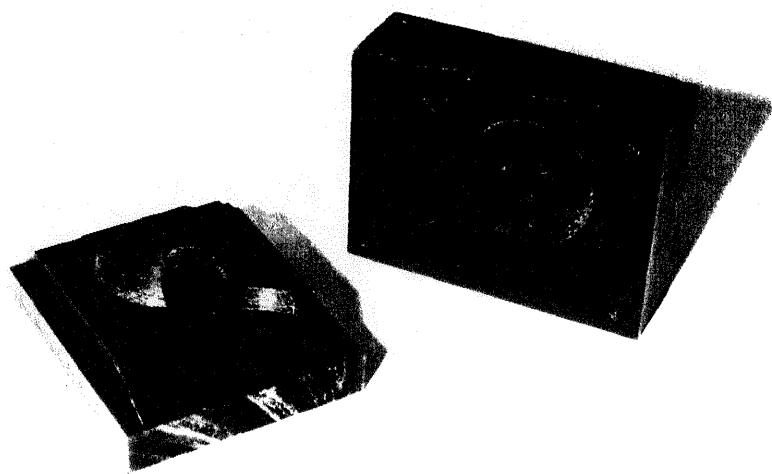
The finished part produced by adaptive laminated machining on a 3 axis milling machine and a flat end milling cutter.
